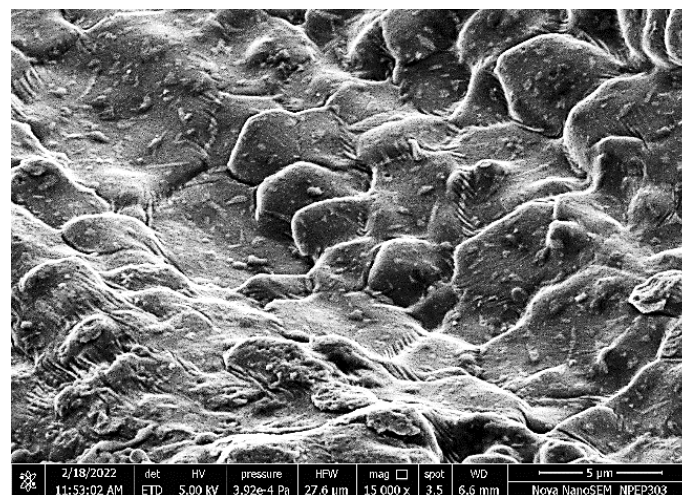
SEM images of the fracture surface of shot-peened *UVaFSWed* joint of AA7075
